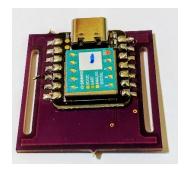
Fabricated Prototype PCBA for low-cost contact thermometer (top view).
